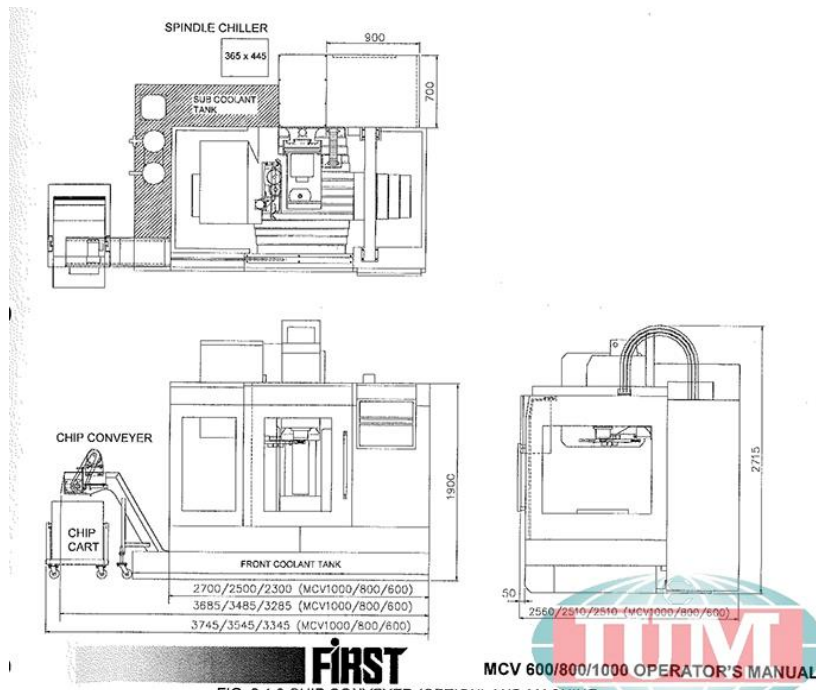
CHIP CONVEYER (OPTION) AND MACHINE
